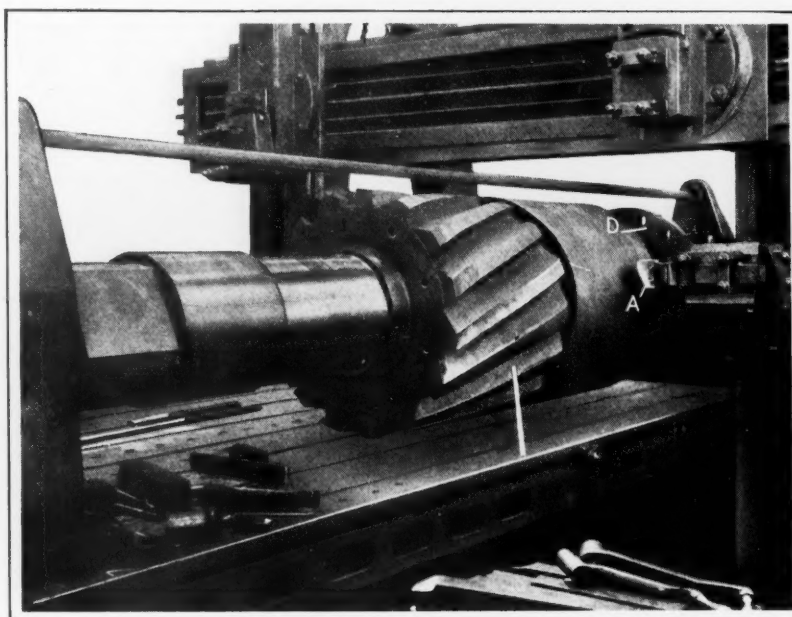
Planing the McNiel Herringbone Grooves on a Crusher Roll, the Operation being One-half Completed
